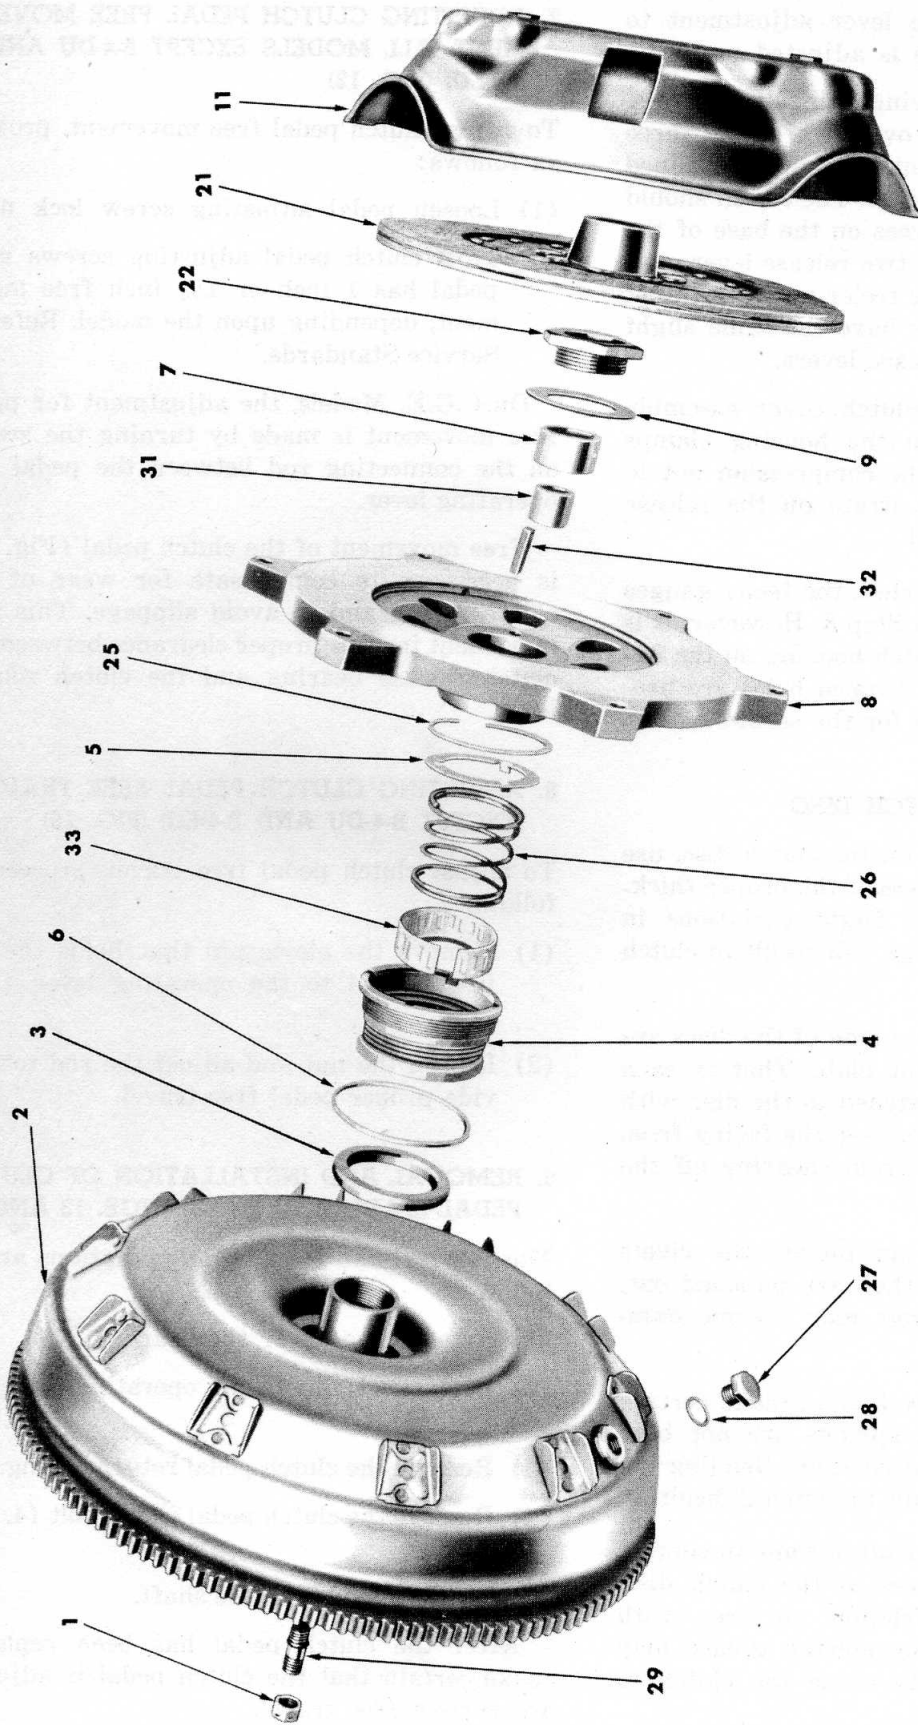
Clutch and Fluid Drive (Disassembled View)
